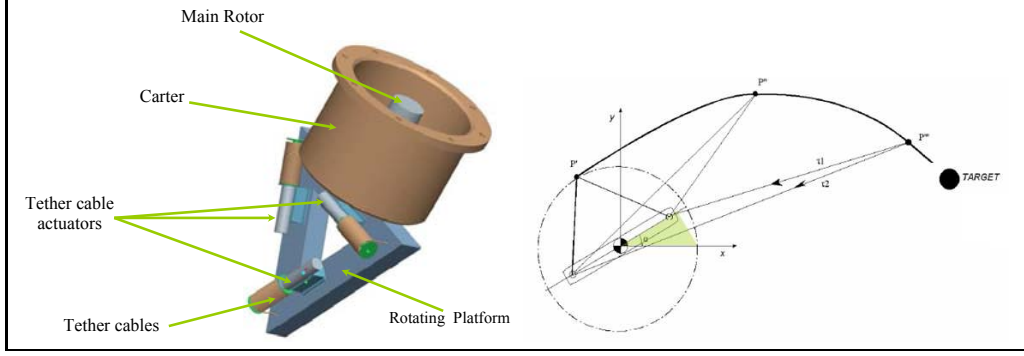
Mechanical design (*left*) and top view projection (*right*) of a simple robot (DAVIDE) to be used for 3-dimensional casting manipulation.
